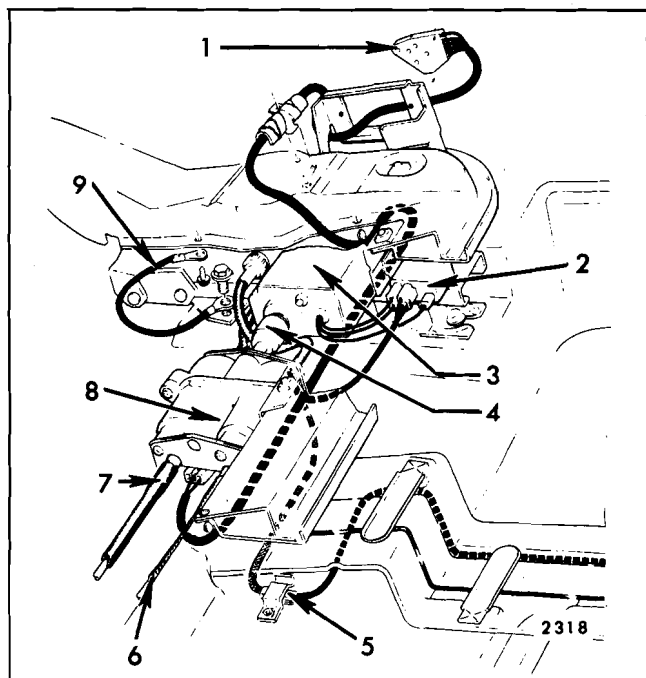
Four-Way Bench Seat Wiring - "A" Body Styles
